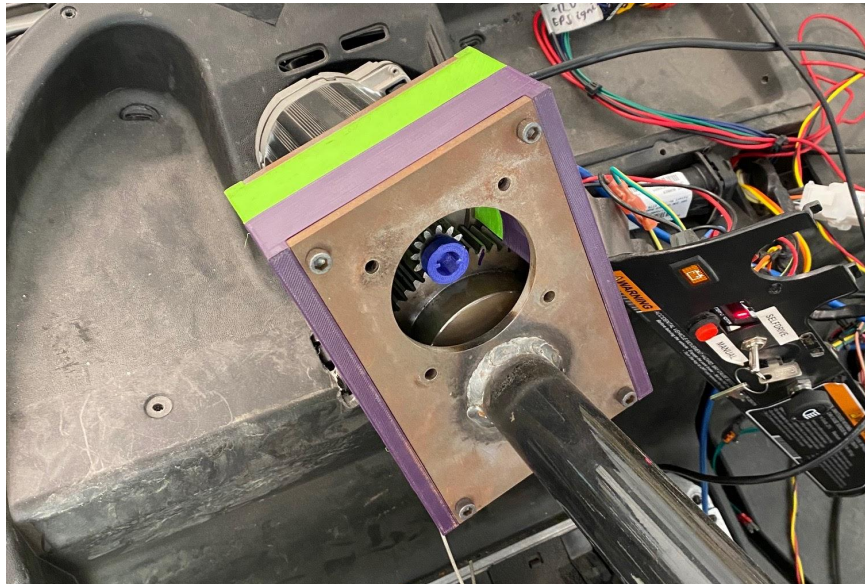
The Teknic ClearPath servo motor steering system. The gears are housed in a steel and 3D printed enclosure.
